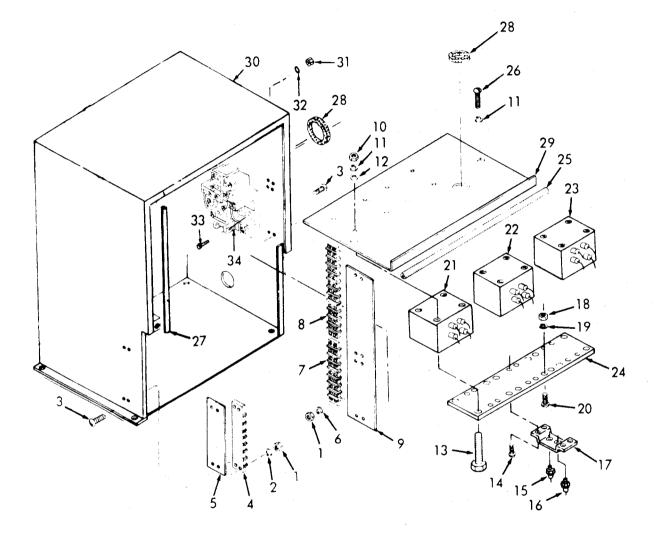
Control Box and Coil Assembly, Removal and Installation.
